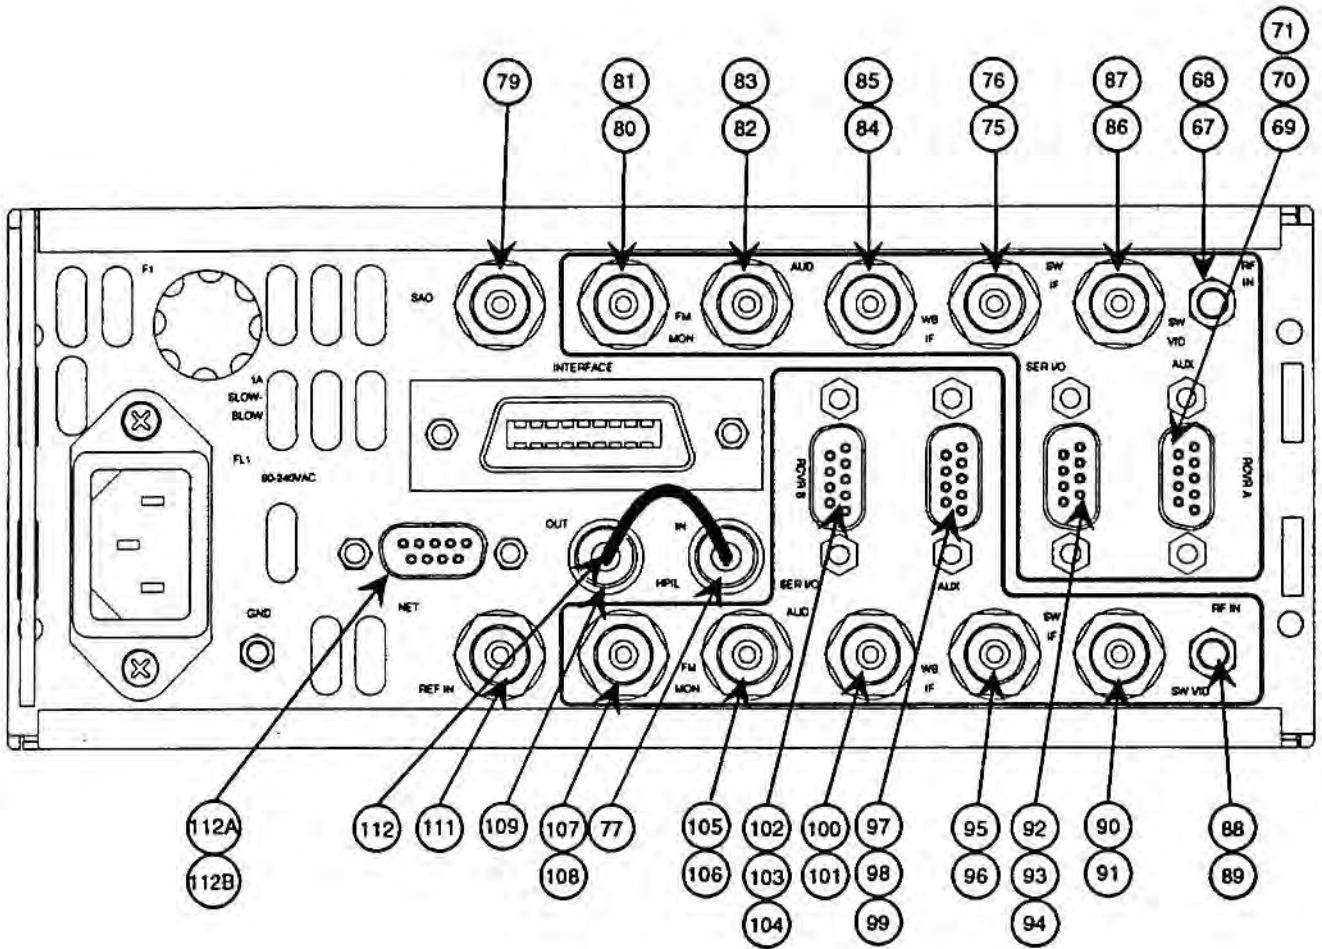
WJ-9902-2 Receiver Controller Assembly Parts Location
